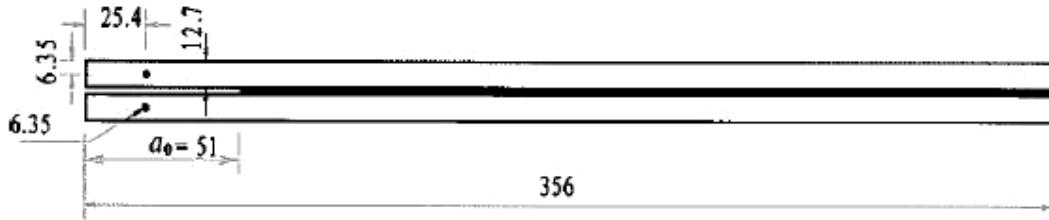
Geometry of DCB specimen in ASTM D3433-99(dimensions in mm) [21].
